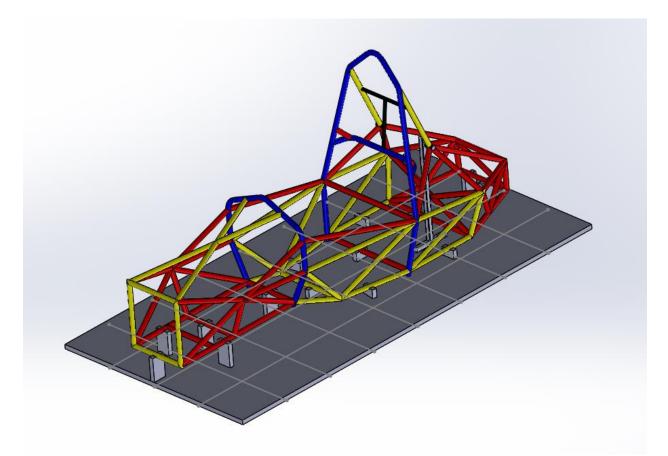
Final Frame on Welding Table with Fixtures
